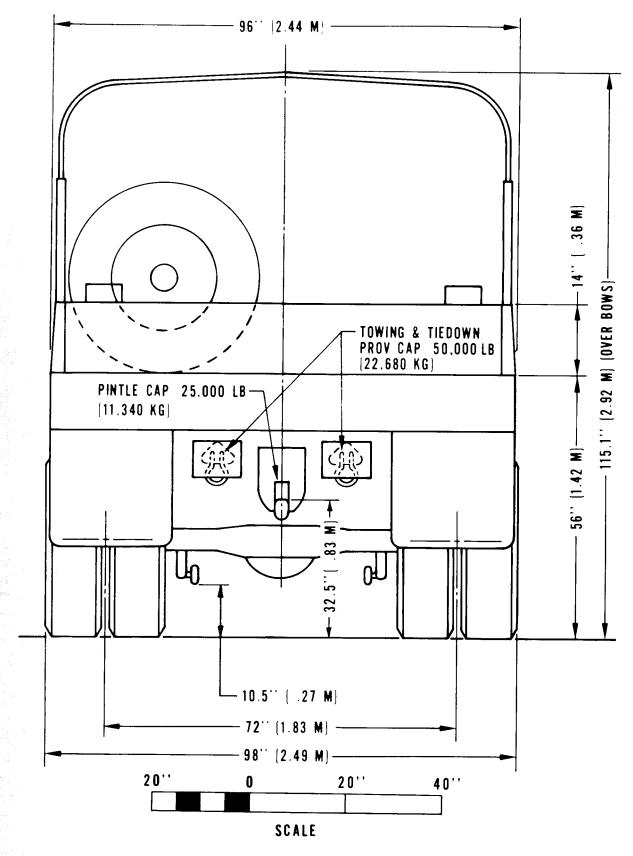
Rear elevation of truck, dropside, WWN and WOWN, M813A1.
